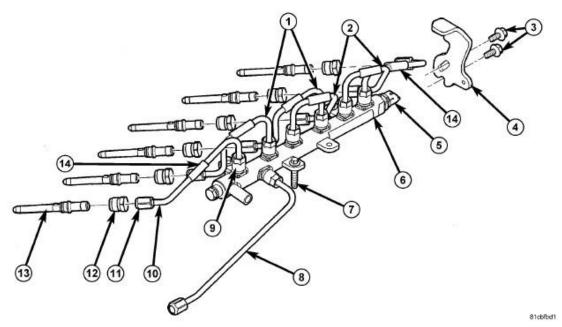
Exploded View Of Fuel Lines, Fuel Rail & Injectors Courtesy of CHRYSLER GROUP, LLC
